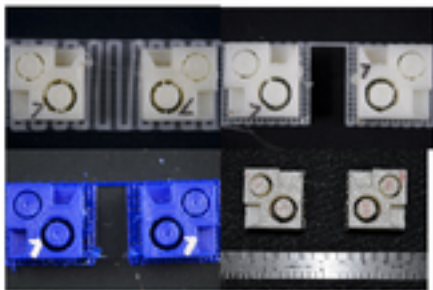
Top View of 3D printer - Top Left - Redshift 4 Top Left, Top Right - BFB Reprint, Bottom Left - BFB 1000, Bottom Right - Overlap 12.000
